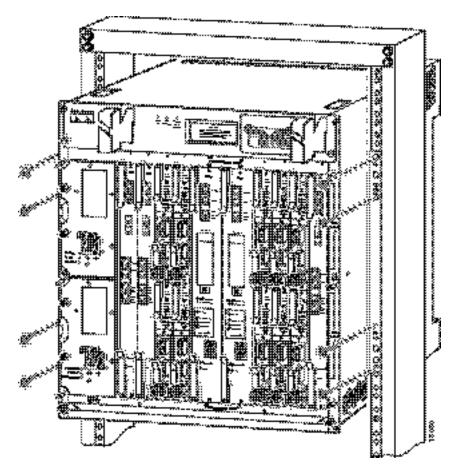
Center-Mounting Cisco 6400 Chassis in a 19-Inch Rack
